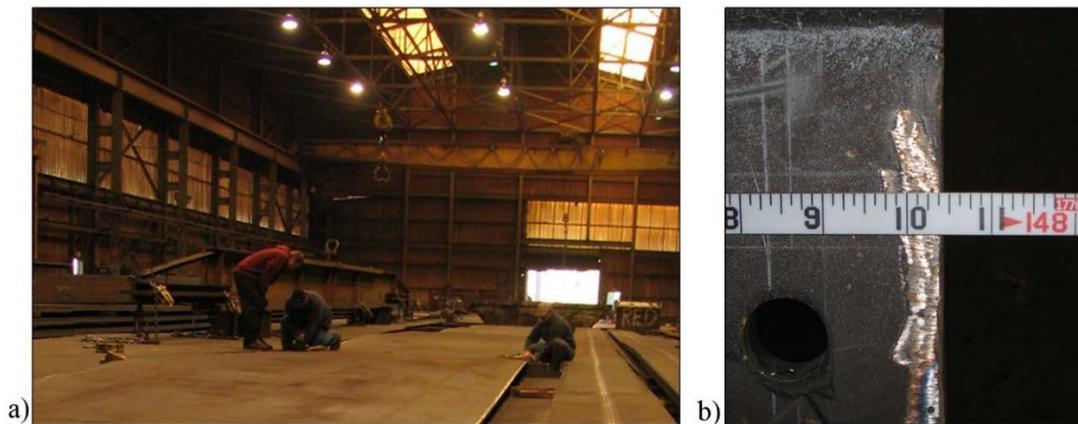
Tape Measurement a) of Flat Plates and b) Showing Measurement of an Irregular Edge
